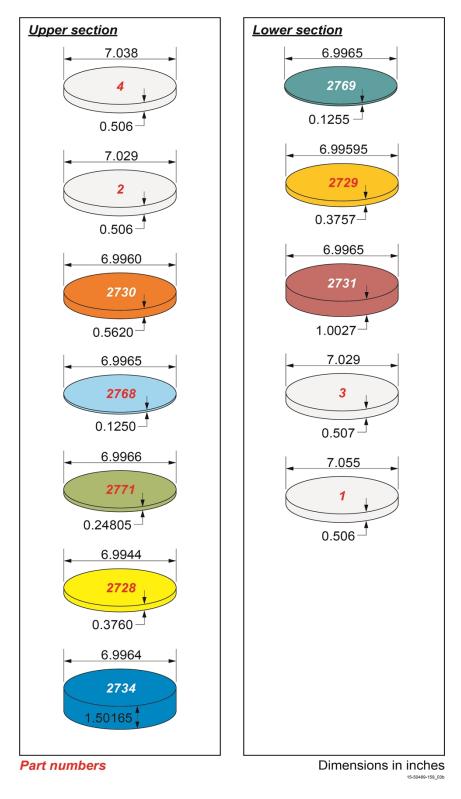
Description of the uranium metal and steel parts for the experiment with 1 in. thick top and bottom reflectors and unfilled holes in the uranium metal. Measured thickness of the stainless steel was 1.026 in. on top and 1.0246 in. on bottom.
